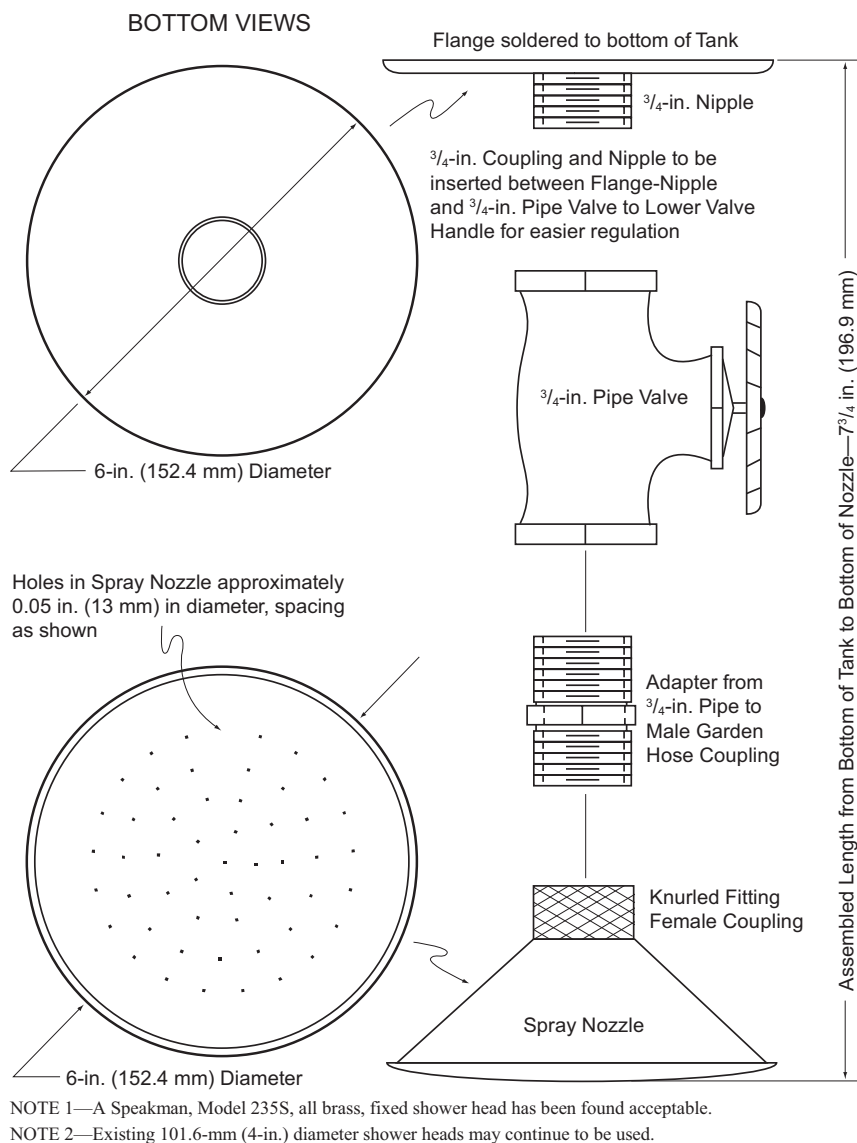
Valve and Nozzle Assembly for Constant-Head Flow Tank
